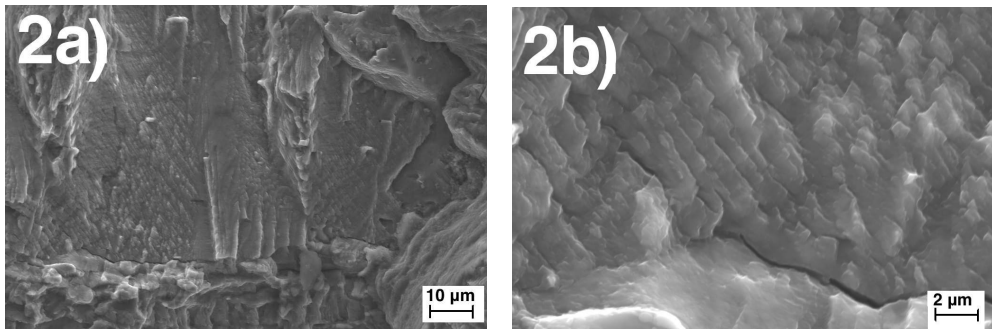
Fracture surface of base material AA6082.50-T6 with slip bands and secondary cracks.
